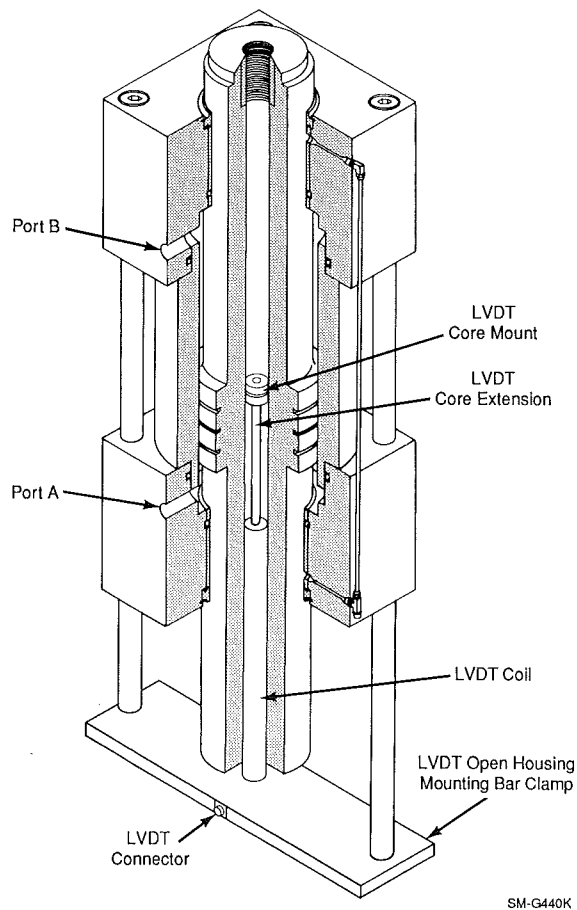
Cutaway View of a Typical Series 244 Hydraulic Actuator for Load Frame Applications
